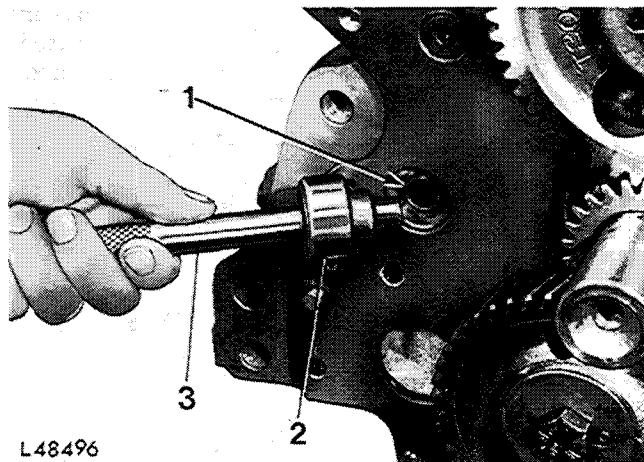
Driving in Valve Seat Bushing of Oil Pressure Regulating Valve
